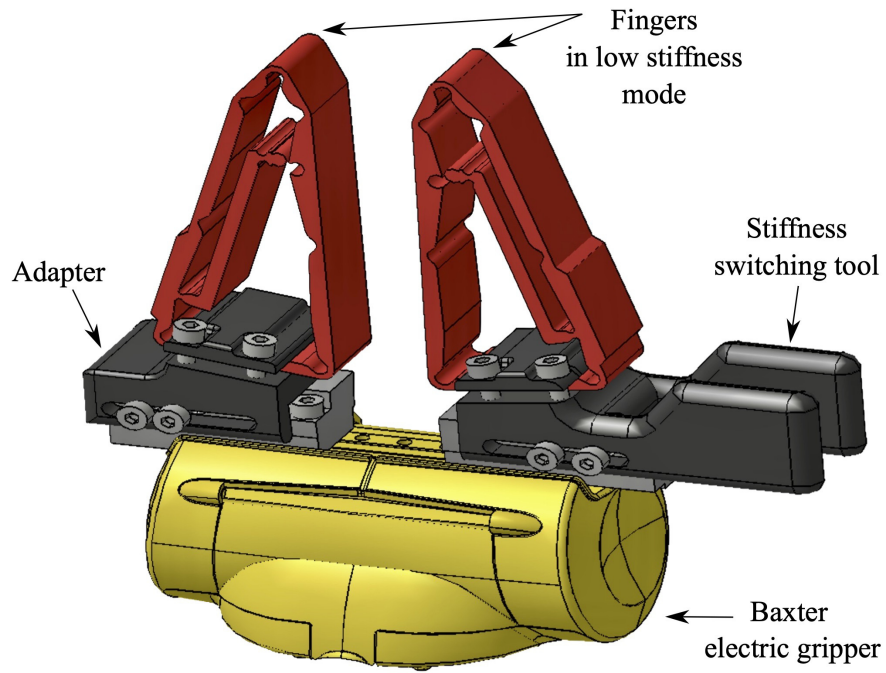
CAD model of the hand assembly on the Baxter robot
